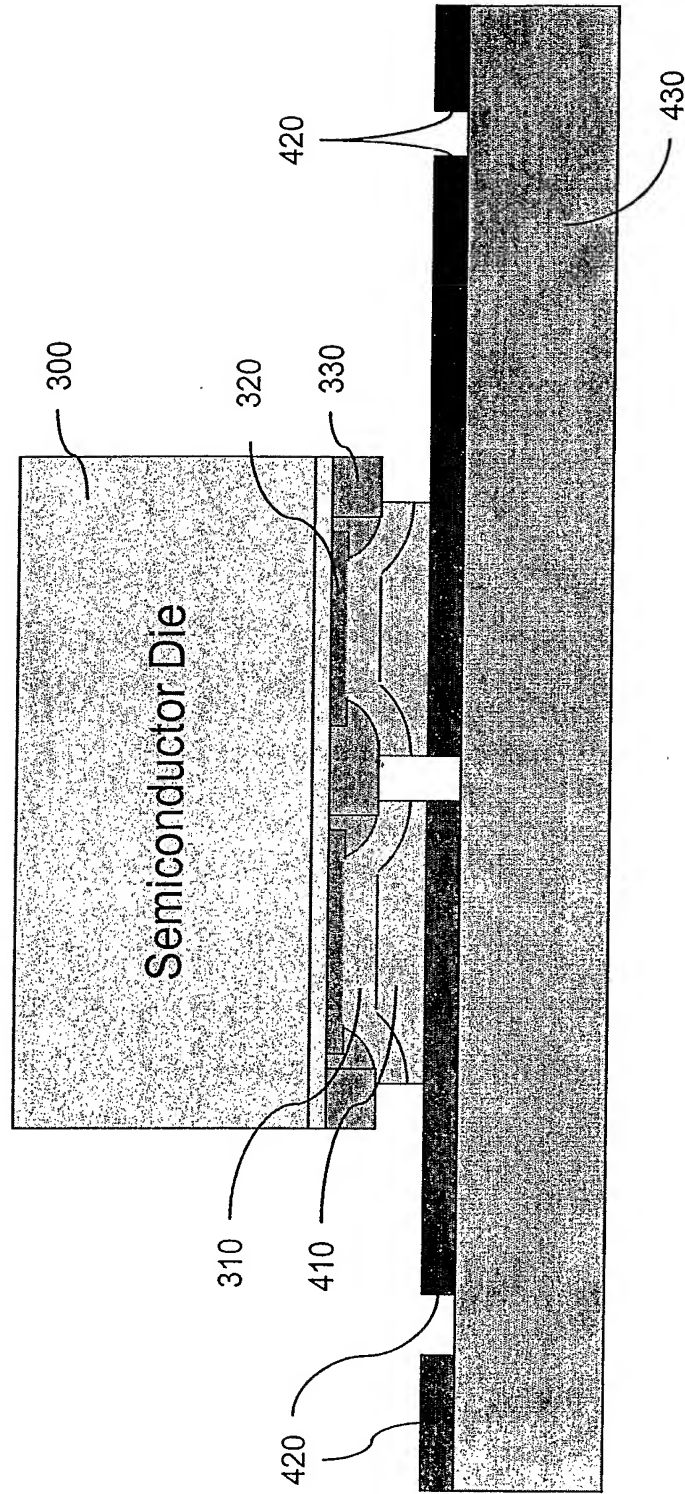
Illustration of Die with Solderable Electrical Contacts Mounted on Printed Circuit Board
